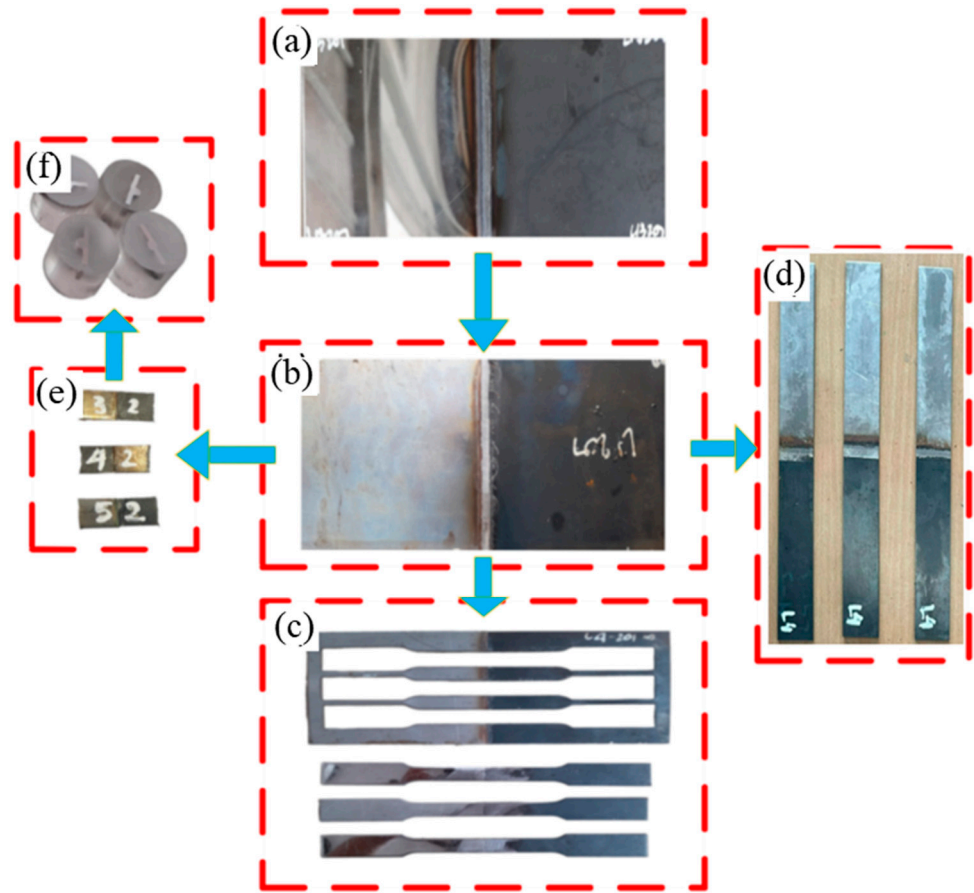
Prepare steps for tensile and bending test samples, including welding and preparing samples for microstructure, bending, and tensile tests. (a) weld dissimilar SUS201 and C20 steel, (b) weld is manufactured, (c) tensile test weld sample, (d) bending test sample preparation, (e) microstructure test preparation, and (f) microstructure test sample.
